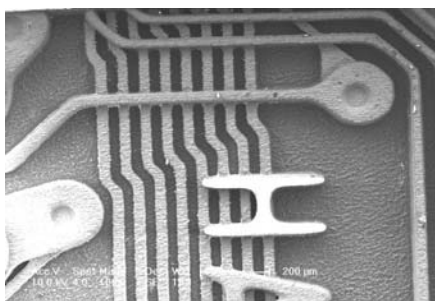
Soldermask and package dielectric laser ablated to expose two layers of substrate
